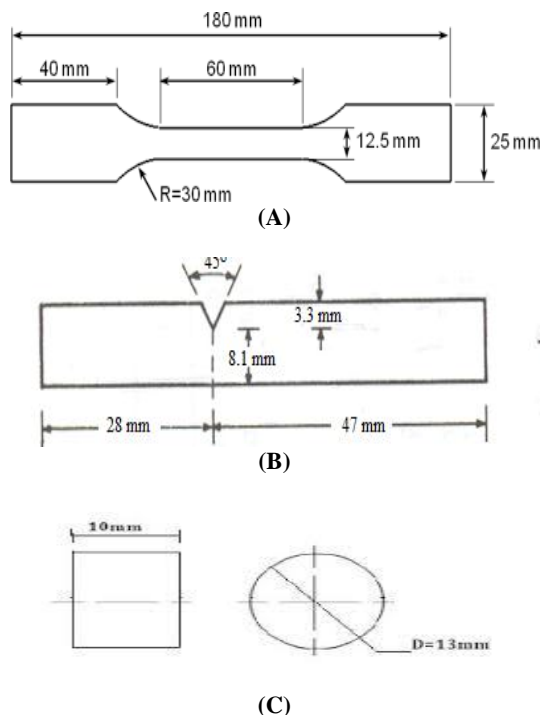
(a) Tensile test specimen, (b) Notch impact test specimen, (c) Hardness/microstructure specimen.
